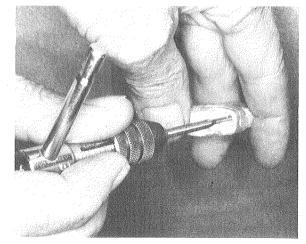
After drilling of holes follow with a No. 2-56 machine tap in a hand wrench to tap or thread holes for screws. Turpentine is used as lubricant for aluminum tapping.
